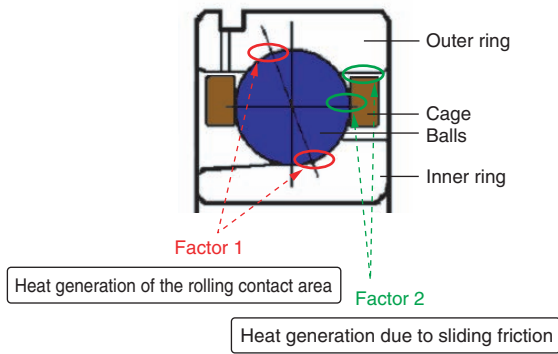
Appearance and heat generation factors of developed angular contact ball bearing
